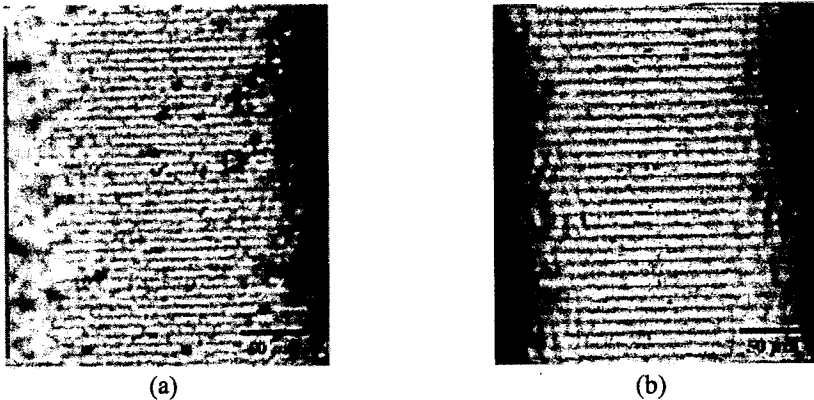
Optical macrographs of the specimens surface after machining with ceramic tool. (a) ME series material. (b) Fe-Co alloy.
